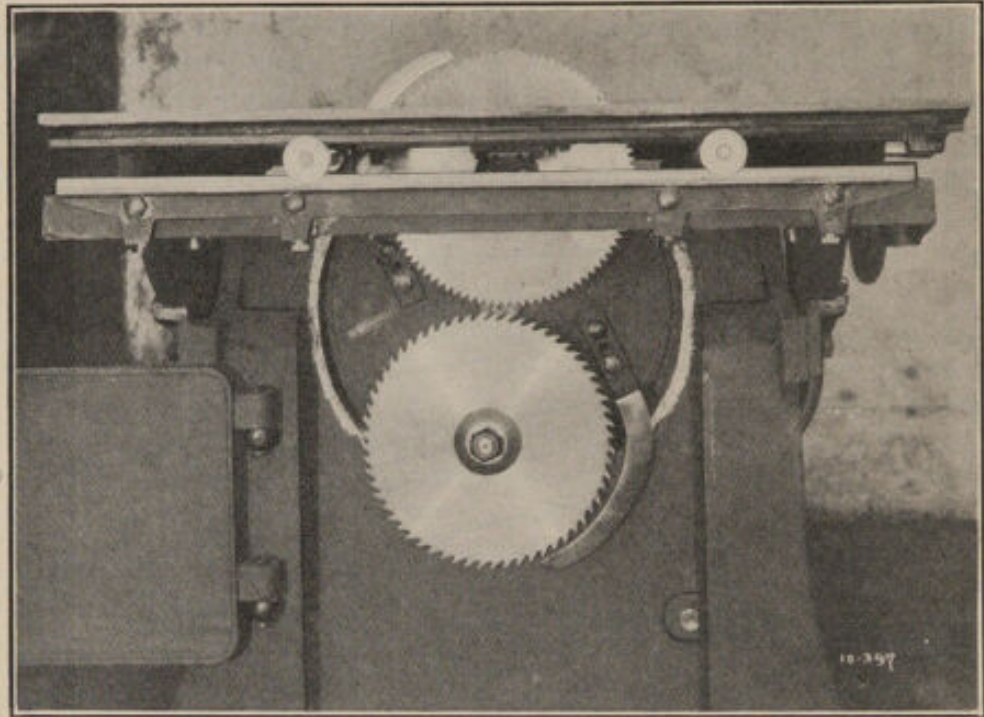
Method of Attachment of Riving Knives for Double Dimension (2-Spindle) Saw. Guard for front and crown of saw is not shown. (Messrs. Thomas White & Sons, Ltd., Laighpark, Paisley.)
